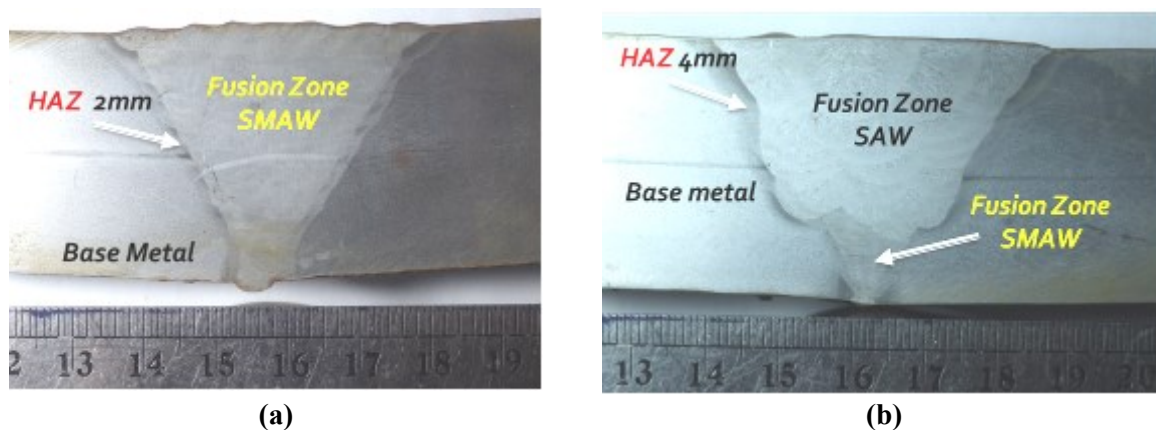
The macro structure of the welding of test specimens (a) welding P1 and (b) welding P2
